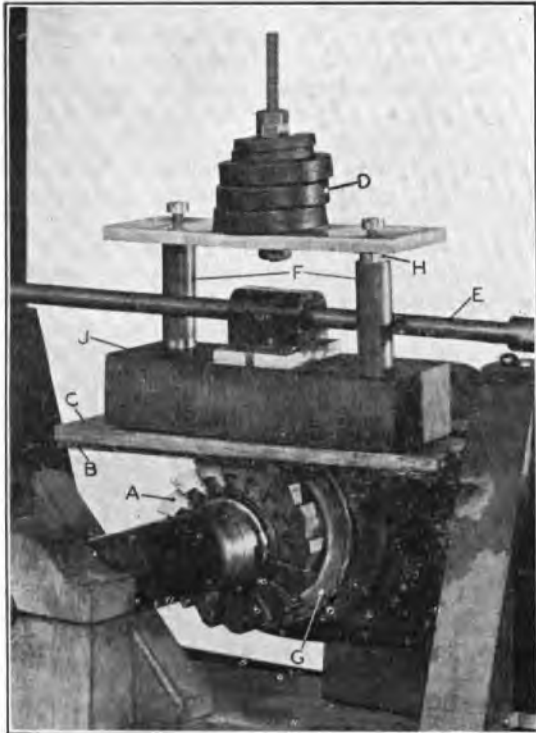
MACHINE FOR TESTING RESISTANCE TO CUTTING.
